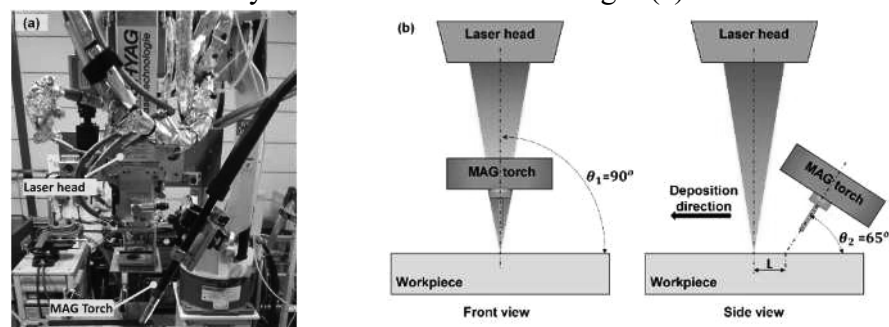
(a) Hybrid laser-arc machine, and (b) schematic representation of the arrangement of the laser head and MAG torch (front and side views).
